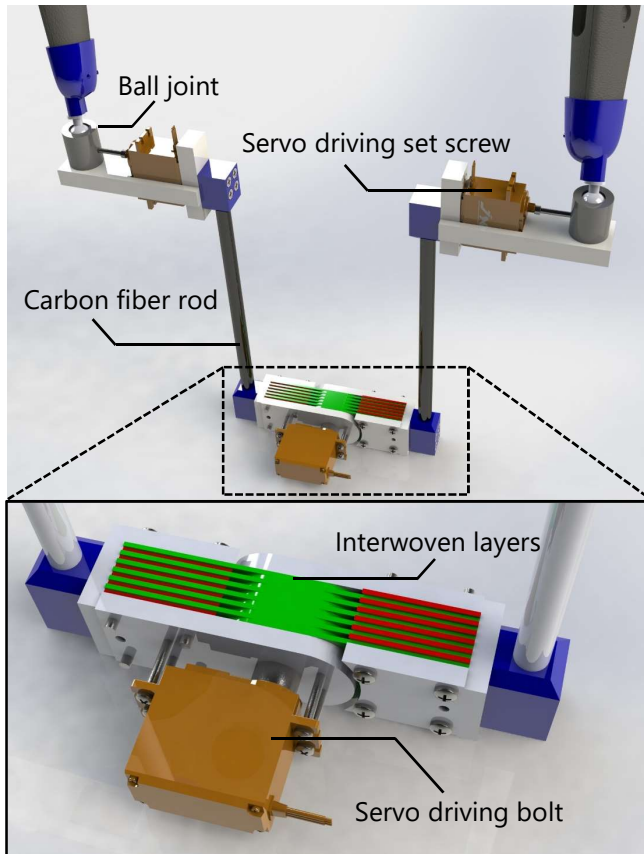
The *Layer-Hinge* prototype consists of locking ball joints to control rotation and a hinge leveraging the friction between layers to control distance between controllers.
